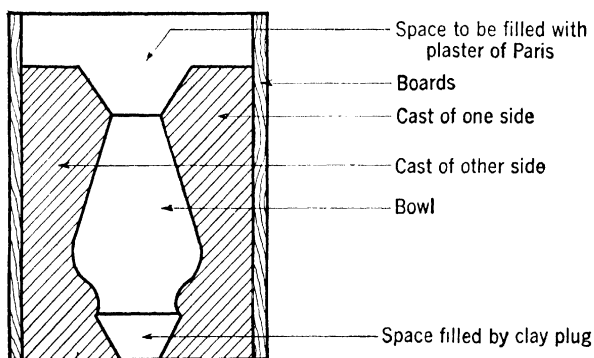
Ready to Pour the Bottom of the Mold, the Third Piece
